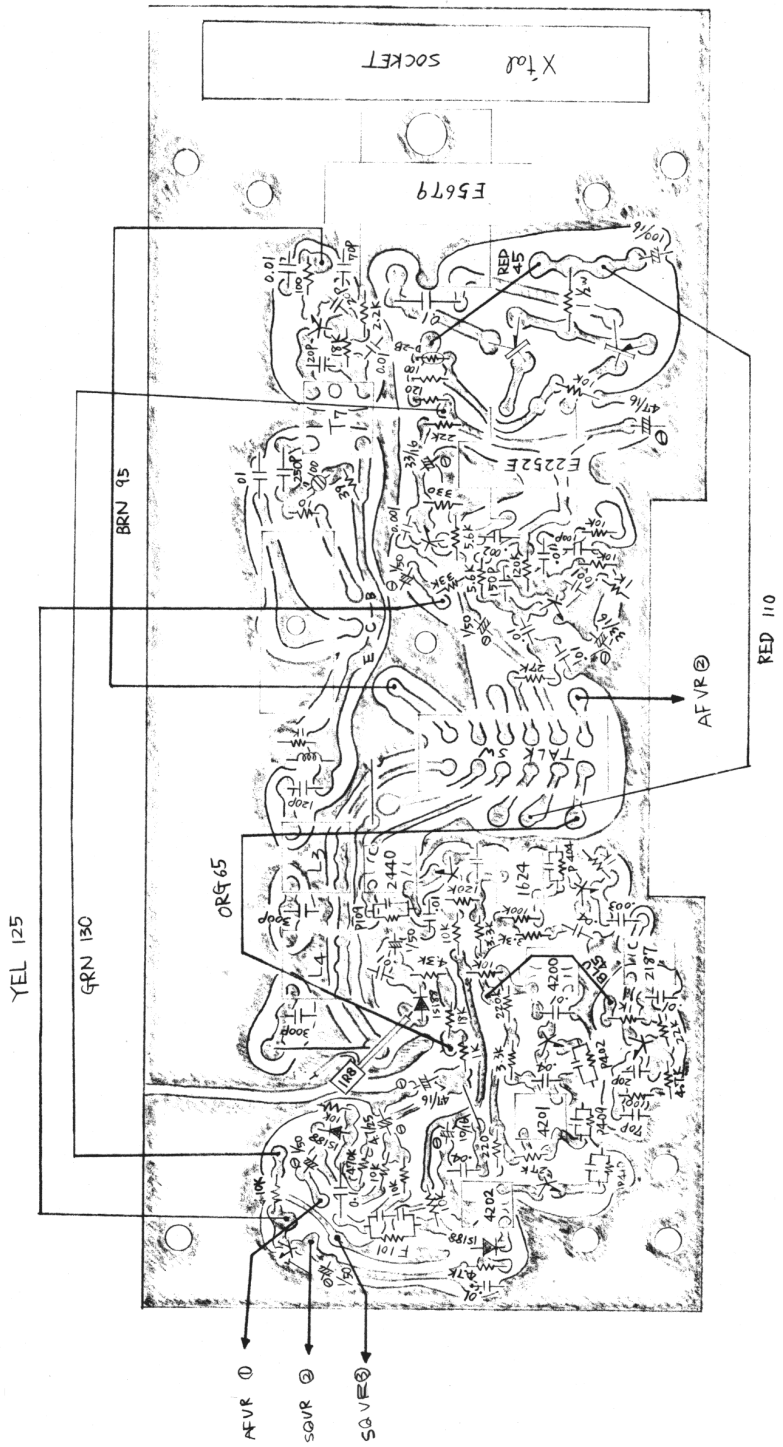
PRINTED CIRCUIT BOARD REAR VIEW
